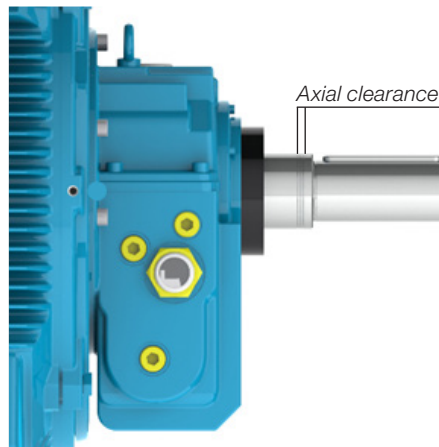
Axial clearance of motor designed with sleeve bearing.
